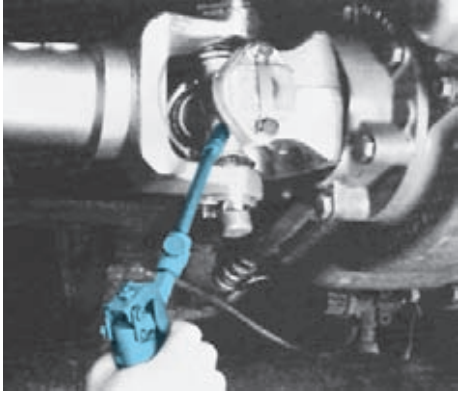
When lubricating a U-joint, grease is pumped into the cross until it comes out of the seal at each bearing cup. (Courtesy of Dana Corporation)
